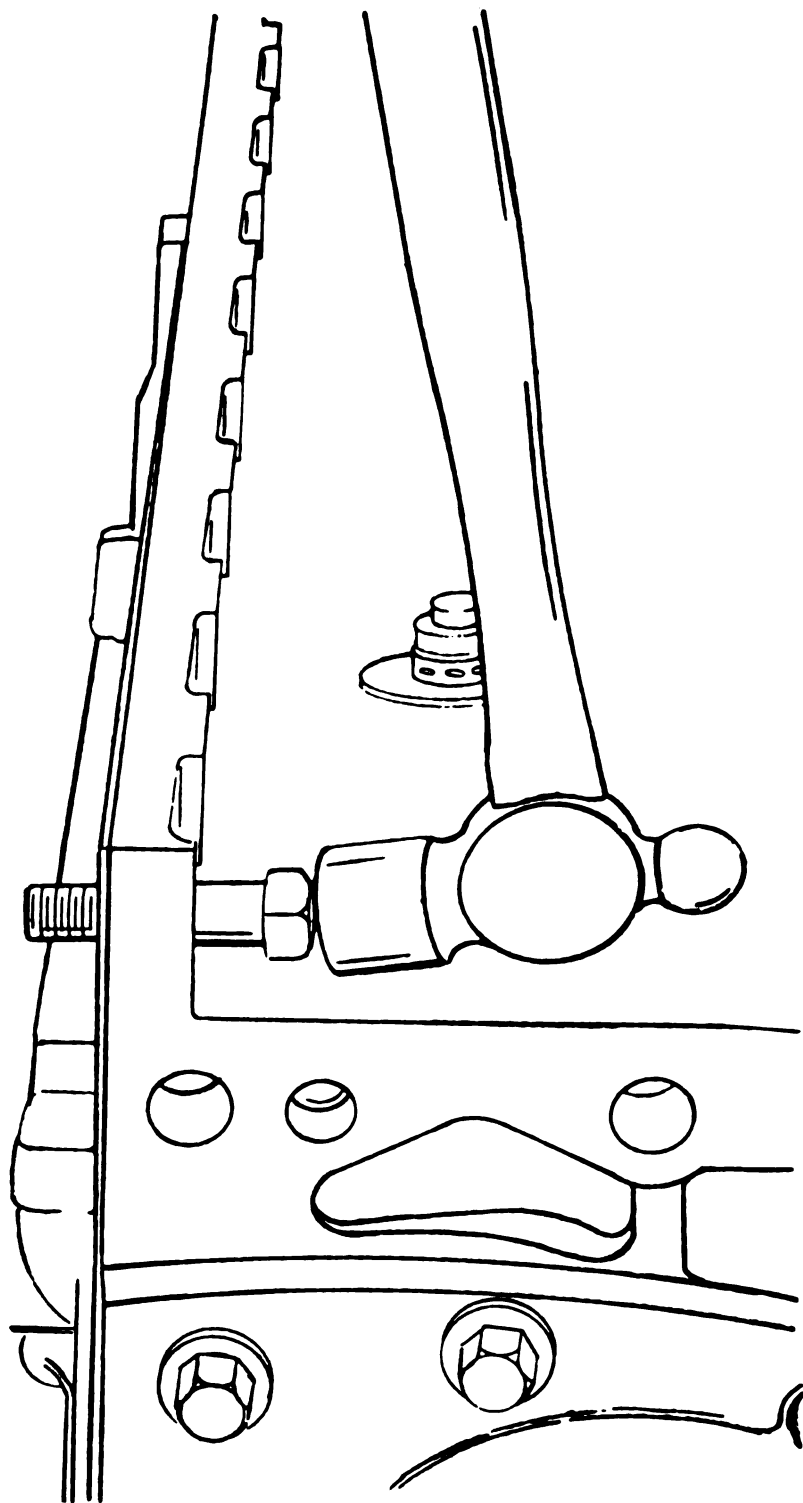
Installing oil pan body-fit bolts in block flange.
